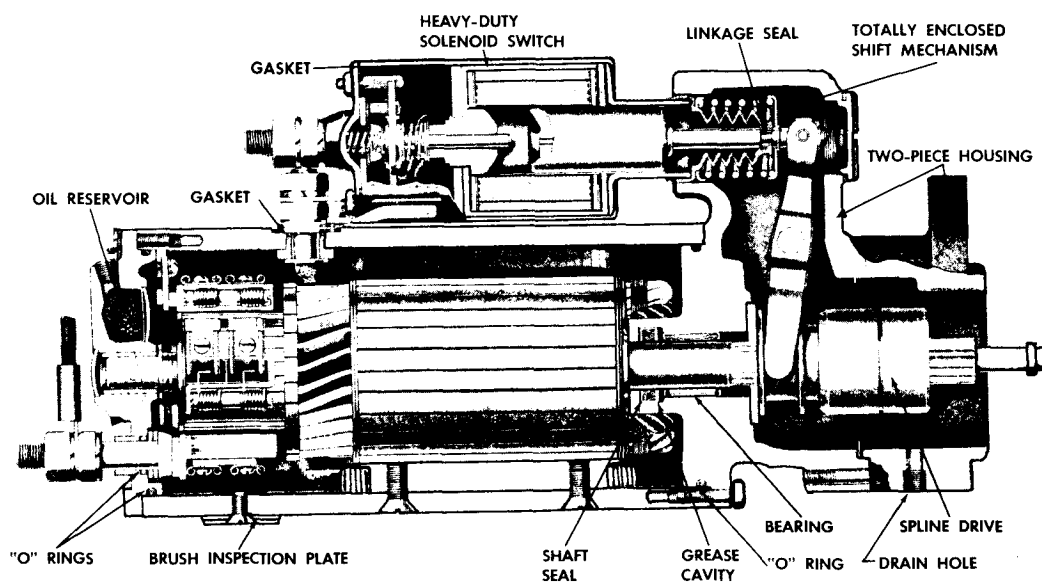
Cross-sectional view of motor with spline drive (50-MT).
